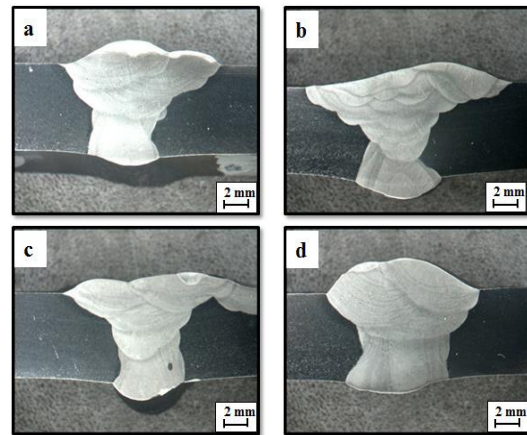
Effects of welding current on the macro morphology of 316 stainless steel butt-welding joint with welding current (a) 80A; (b) 90A; (c) 100A; (d) 110A.
